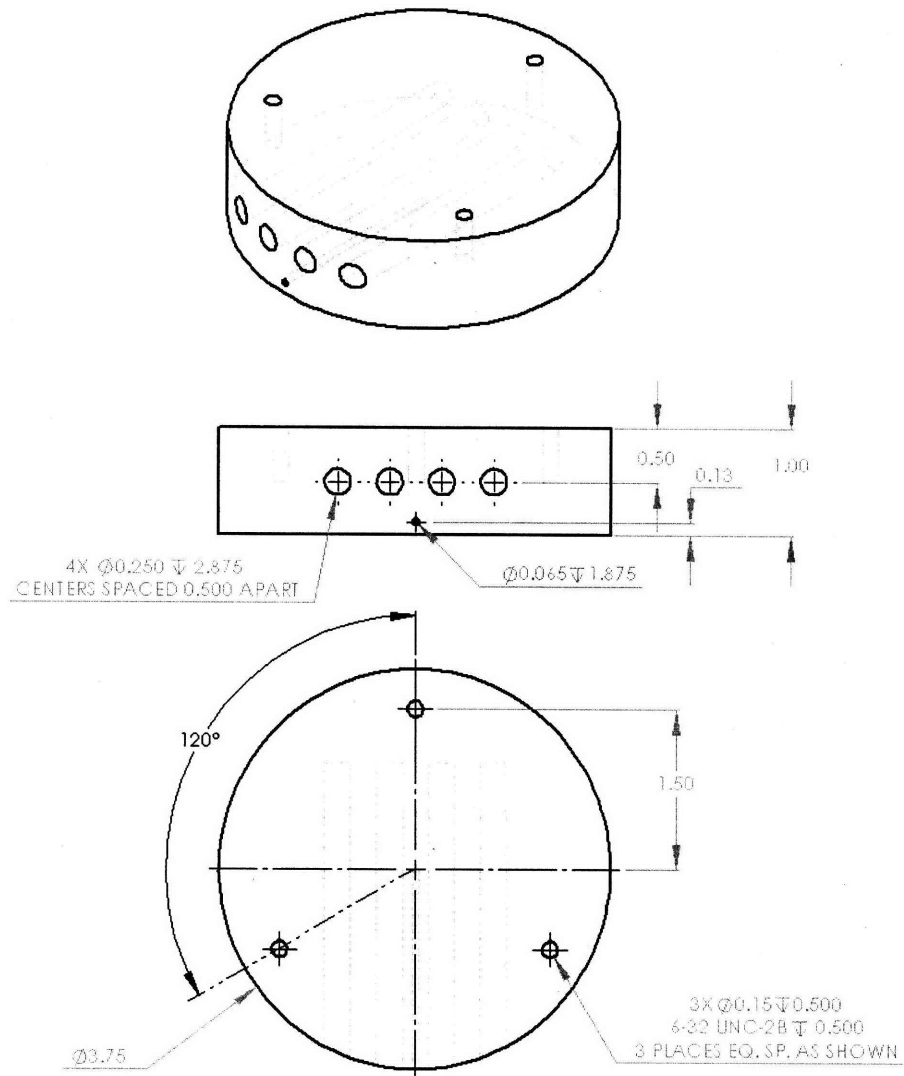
Drawing of insulating plate. Dimensions in inches unless otherwise noted.
